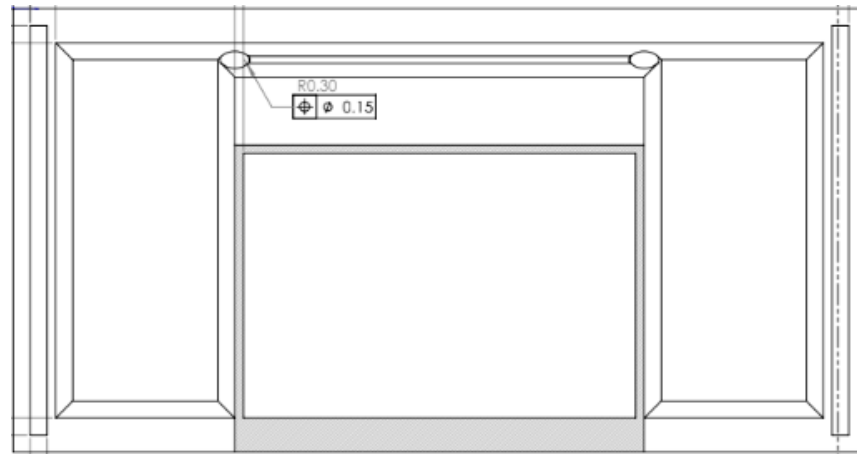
Elevated Platforms (No Drainage) Tabletop Design
